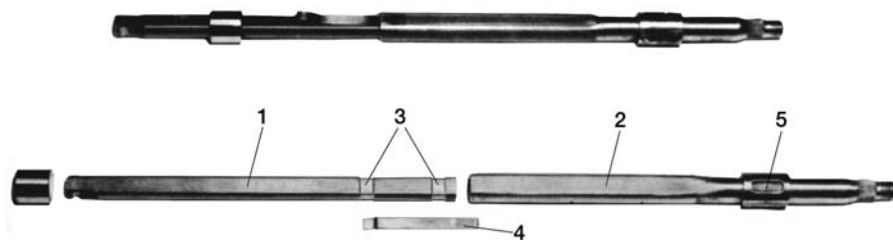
Telescopic collapsible steering tubes consist of a lower part 1, which is flattened on the outside, and a hollow part 2, which is flattened on the inside. The two will be fitted together; the two plastic bushes 3 ensure that the assembly does not rattle and that the required shear-off force in the longitudinal direction is met. The tab 4 fixed to part 1 ensures the passage of electric current when the horn is operated. The spigot of the steering wheel lock engages with the welded-on half shells 5 (illustration: Lemförder Fahrwerktechnik).
